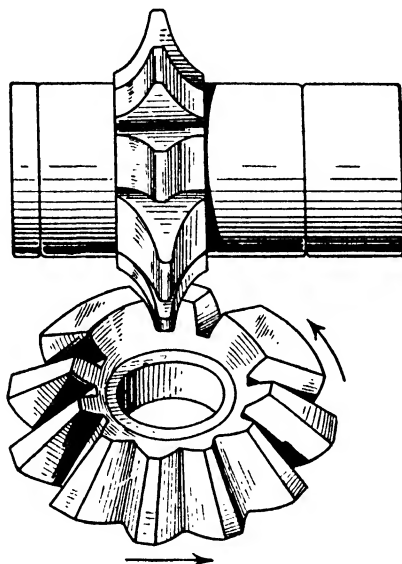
Setting work off-center to widen tooth space at outer end.
